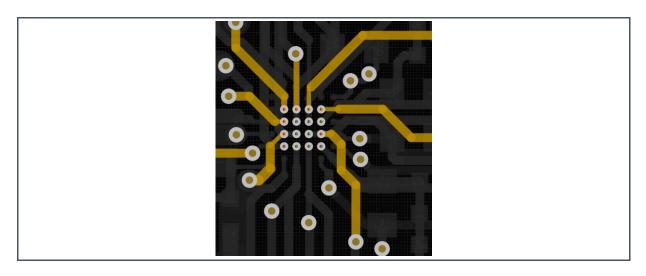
PCB Layout Signal Layer 2 – All Pins Routed
